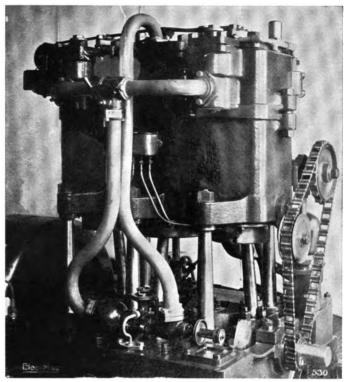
HIGH-SPEED COMPOUND OIL-ENGINE.
